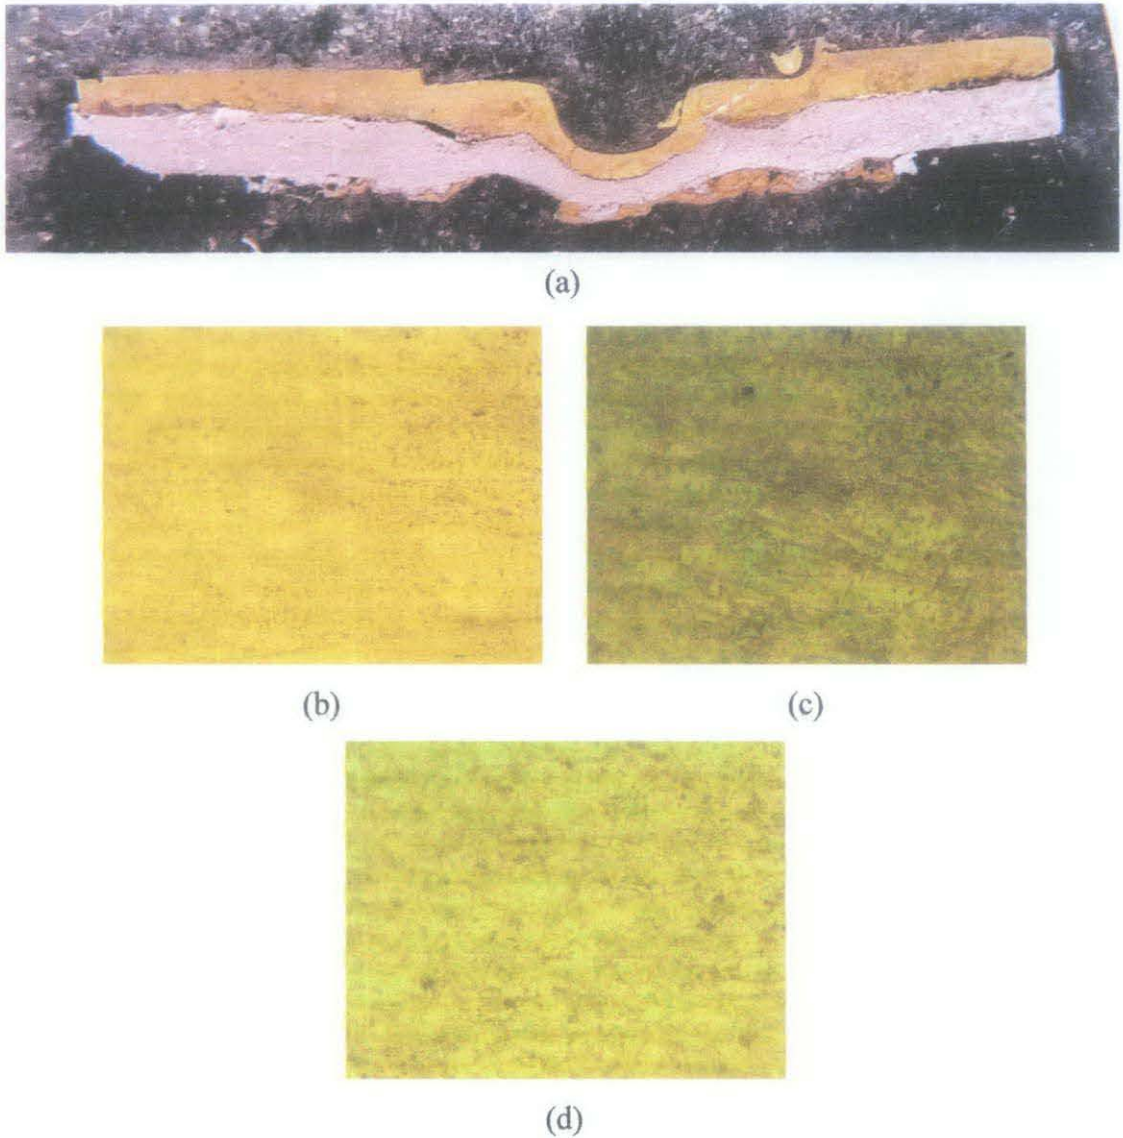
(a) Cross-sectional view of weld region formed by Friction Stir Spot Welding of Copper Alloy-Aluminum 6061-T6 (b) Micrograph view of base metal region at region I (c) Micrograph view of base TMAZ at region II (d) Micrograph view of stir Zone at region III
